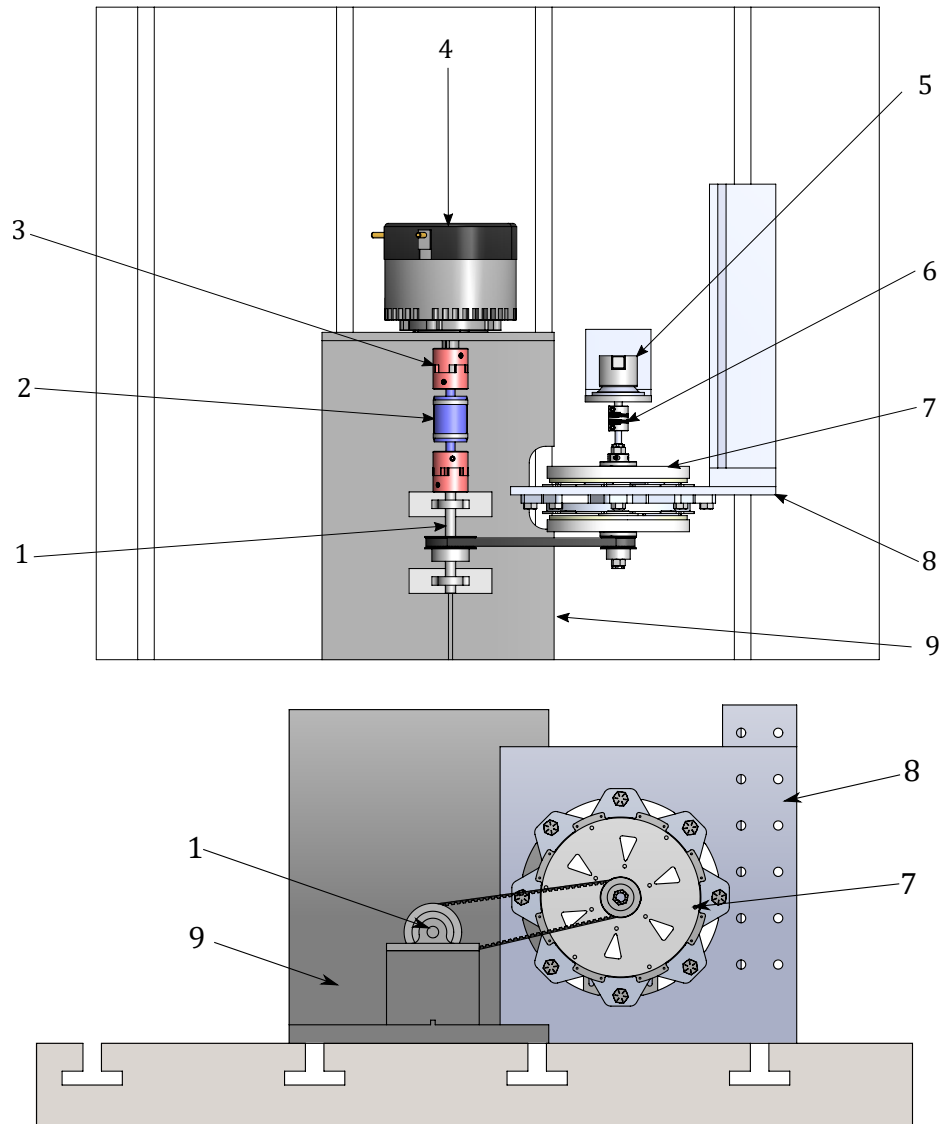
Top and front views of the test setup CAD: 1-Counter-shaft. 2-Torque Sensor. 3-Coupling. 4-DC Dynamometer. 5-Optical enocder. 6-Flexible coupling. 7-AFSRM. 8-AFSRM mounting plate. 9-Dynaomometer mounting plate.
